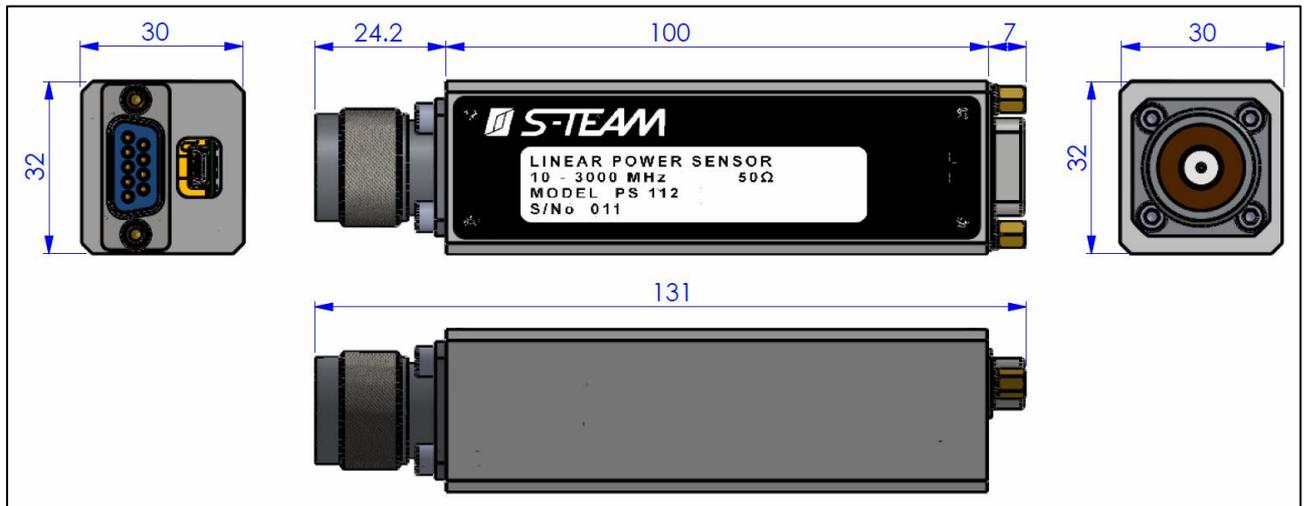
Basic PS112 dimensions. All dimensions are in millimeters.
